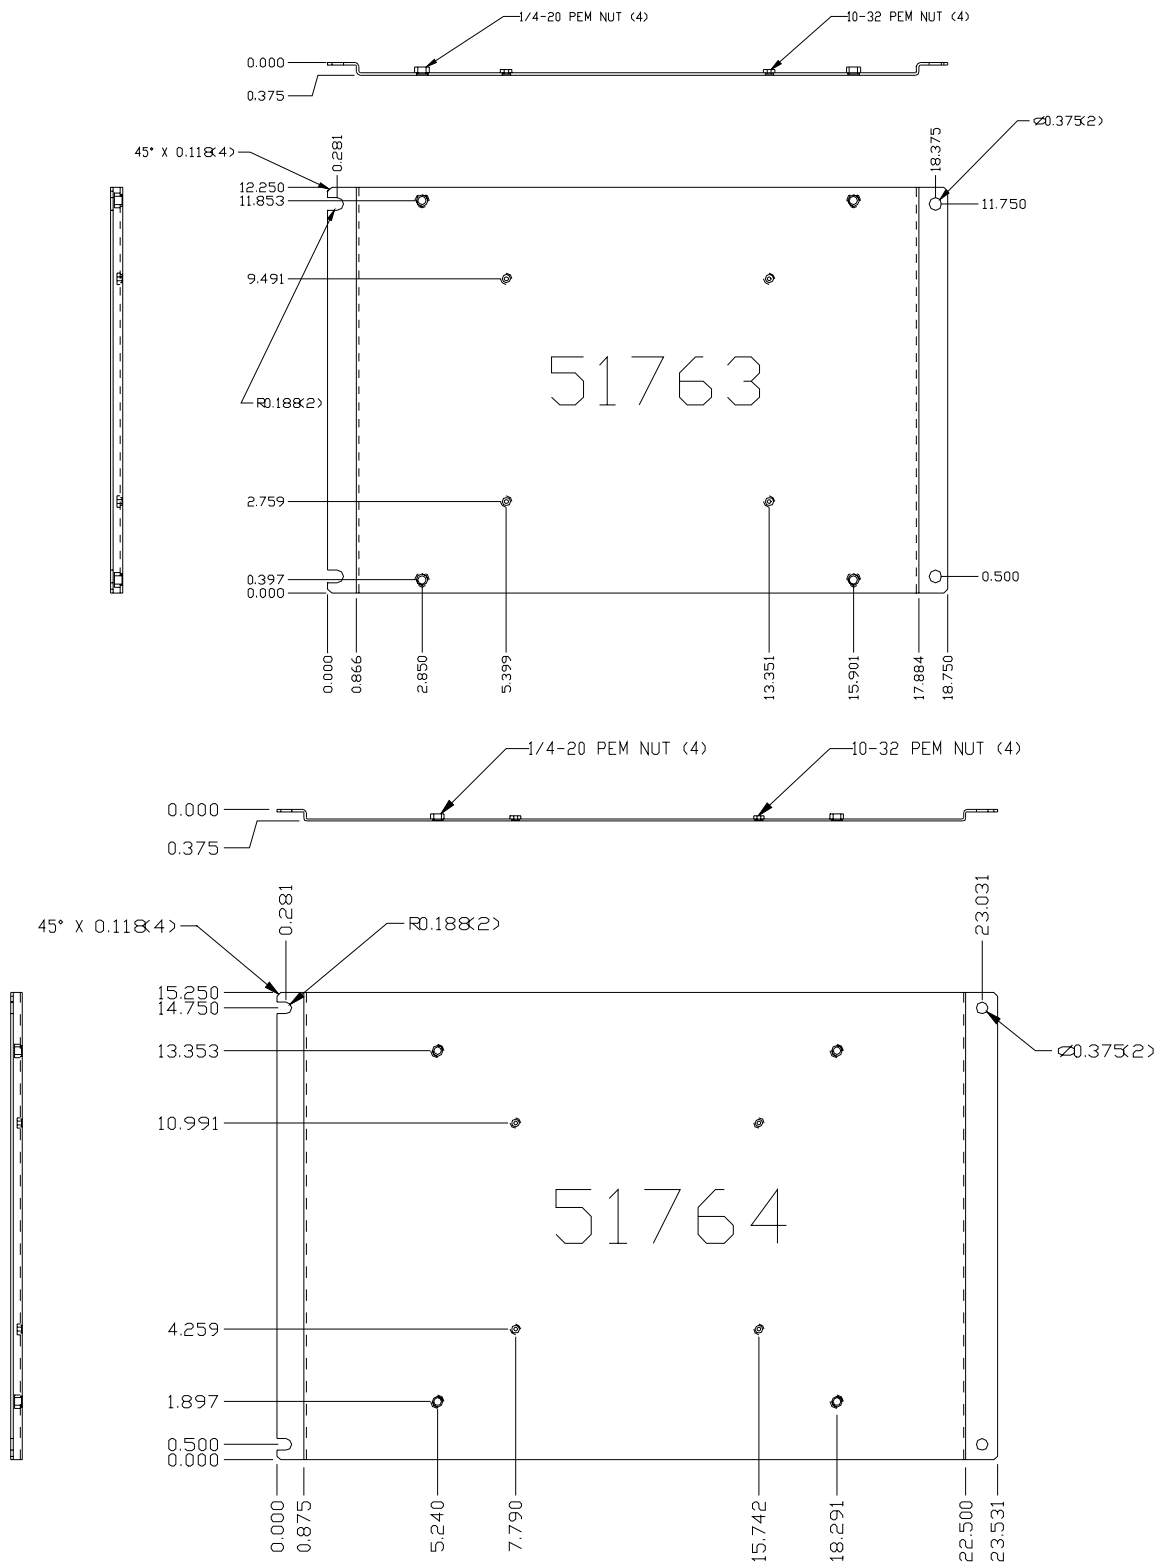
51763 and 51764 adapter mounting plate dimensions.
